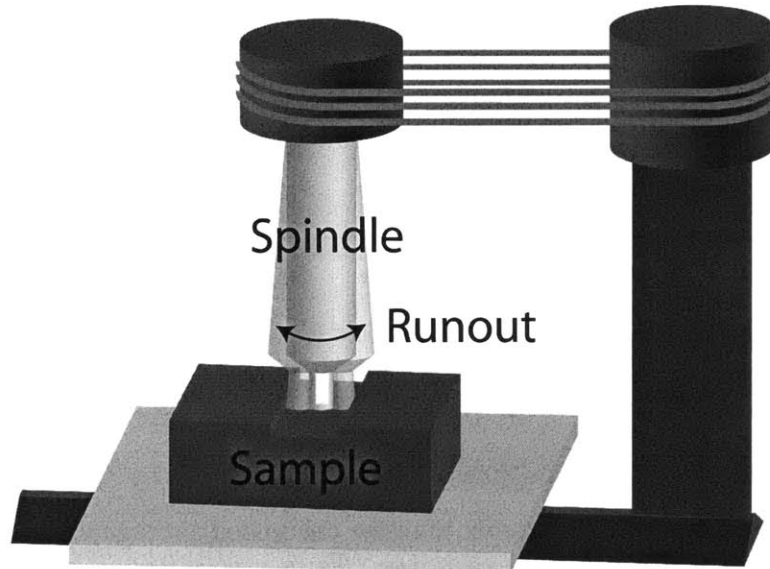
Illustration of a sample being milled with a machine suffering from runout. The milled channel becomes larger and rougher due to runout.
